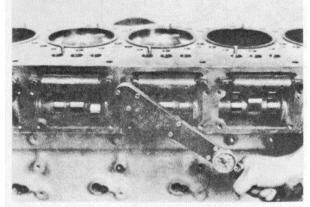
N-25. Tighten the Cam Follower Shaft Capscrews
